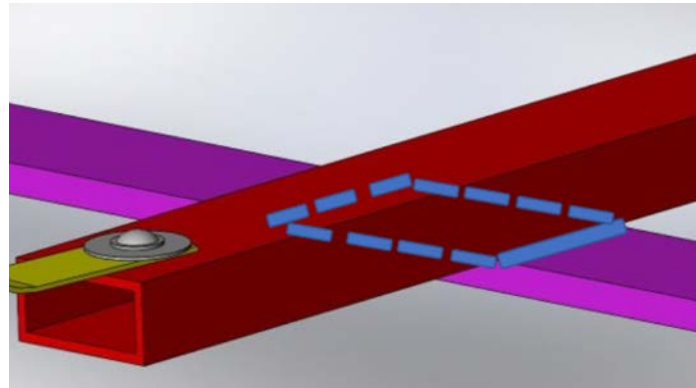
Box Beam Welded to Longitudinal Rail
